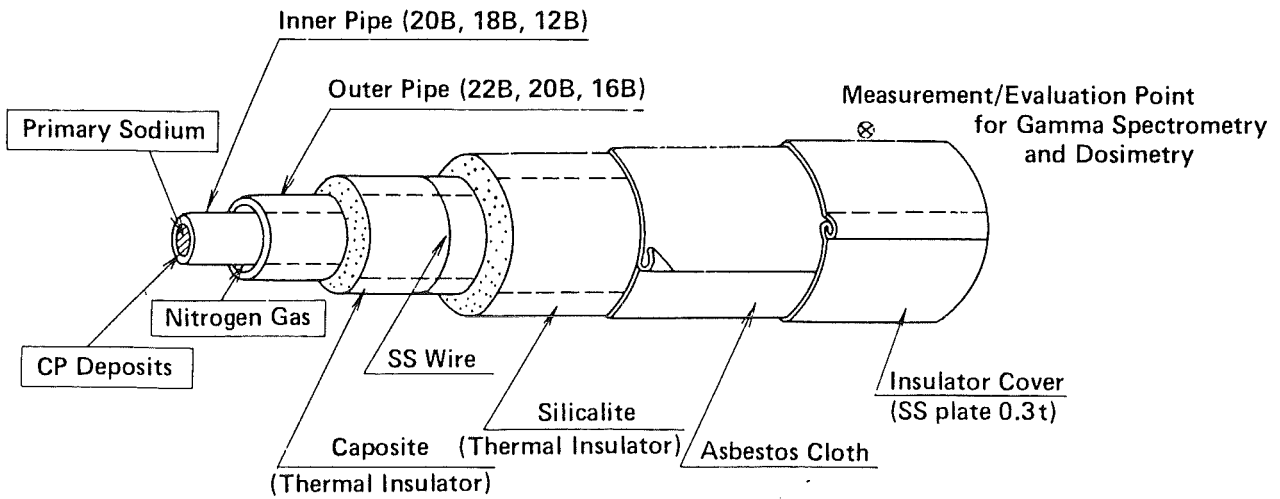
Geometrical Layout for Measurement Points and Sodium Piping
